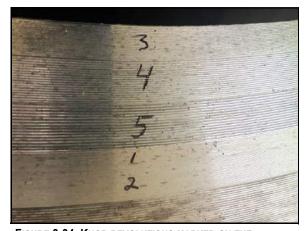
KNOB REVOLUTIONS MARKED ON THE MACHINED FLANGE
